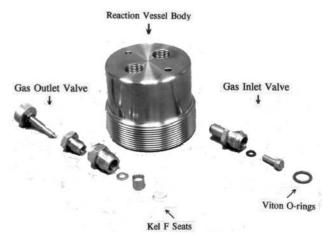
Photo of Reaction Vessel Body Assembly
